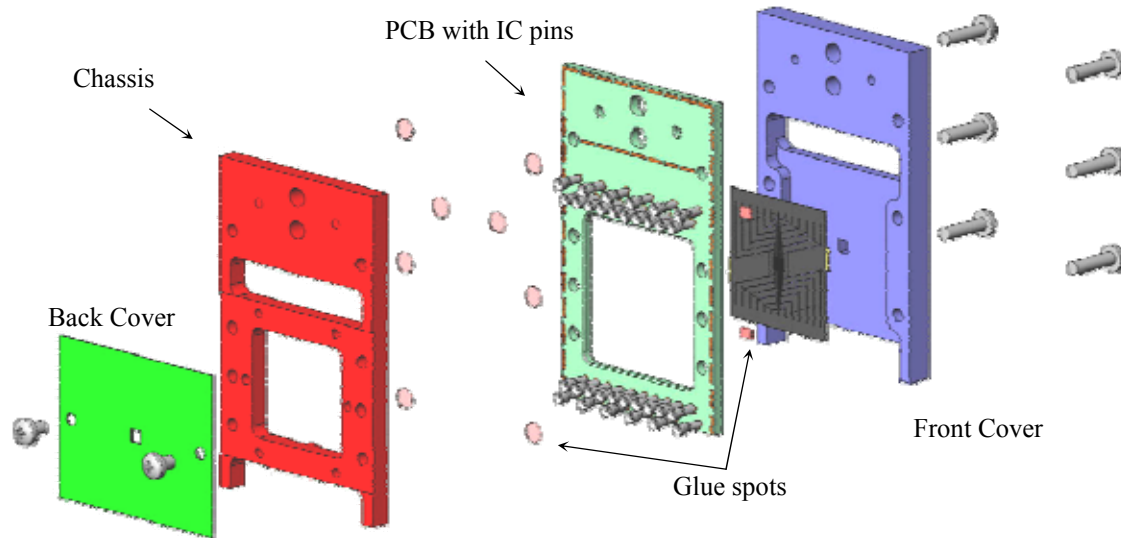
Exploded view of the packaging structure for the spider MOA
